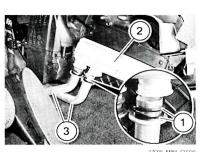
Replace sealing rings (1) and make sure twin pipes (3) are correctly seated on heater core (2)
